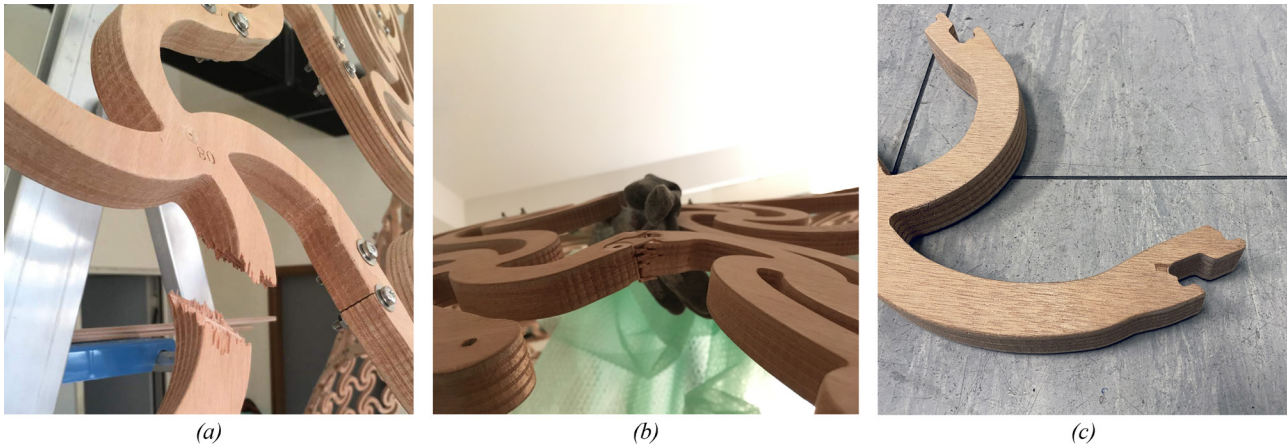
Failure cases occurring during assembly/disassembly: (a) traction/bending; (b) delamination; (c) minor failures
